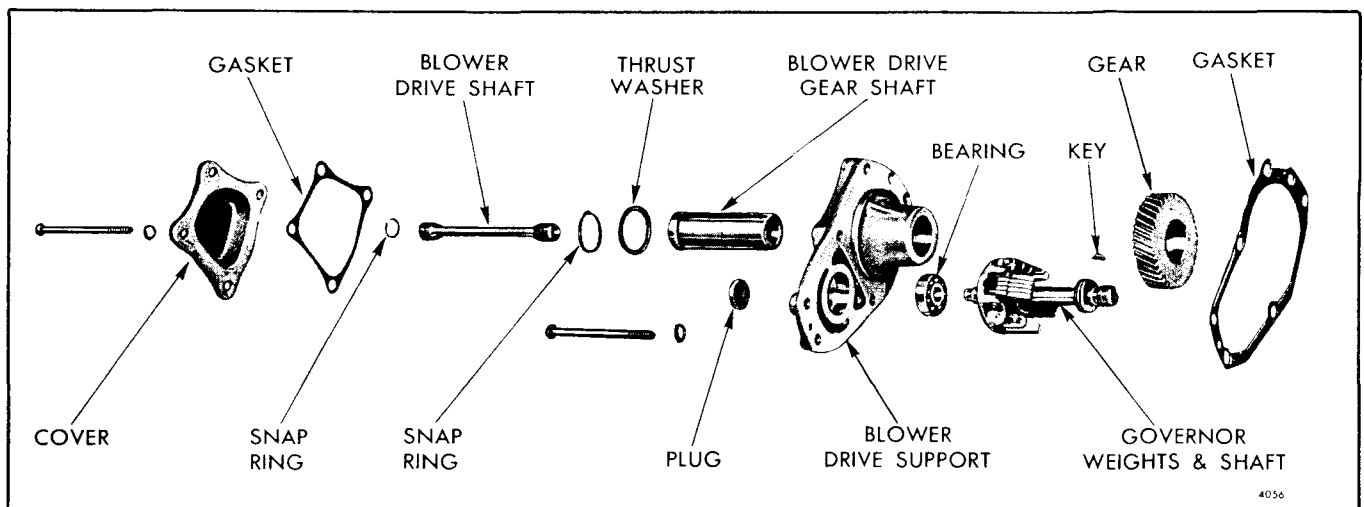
Blower Drive Support Assembly Details and Relative Location of Parts
